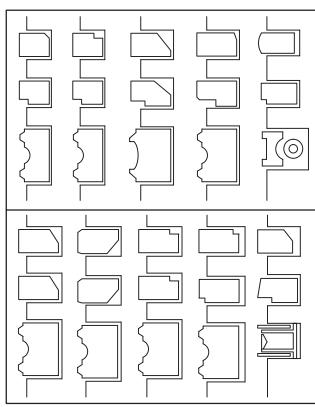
CAST IRON SLEEVE AND CAST IRON CYLINDER
